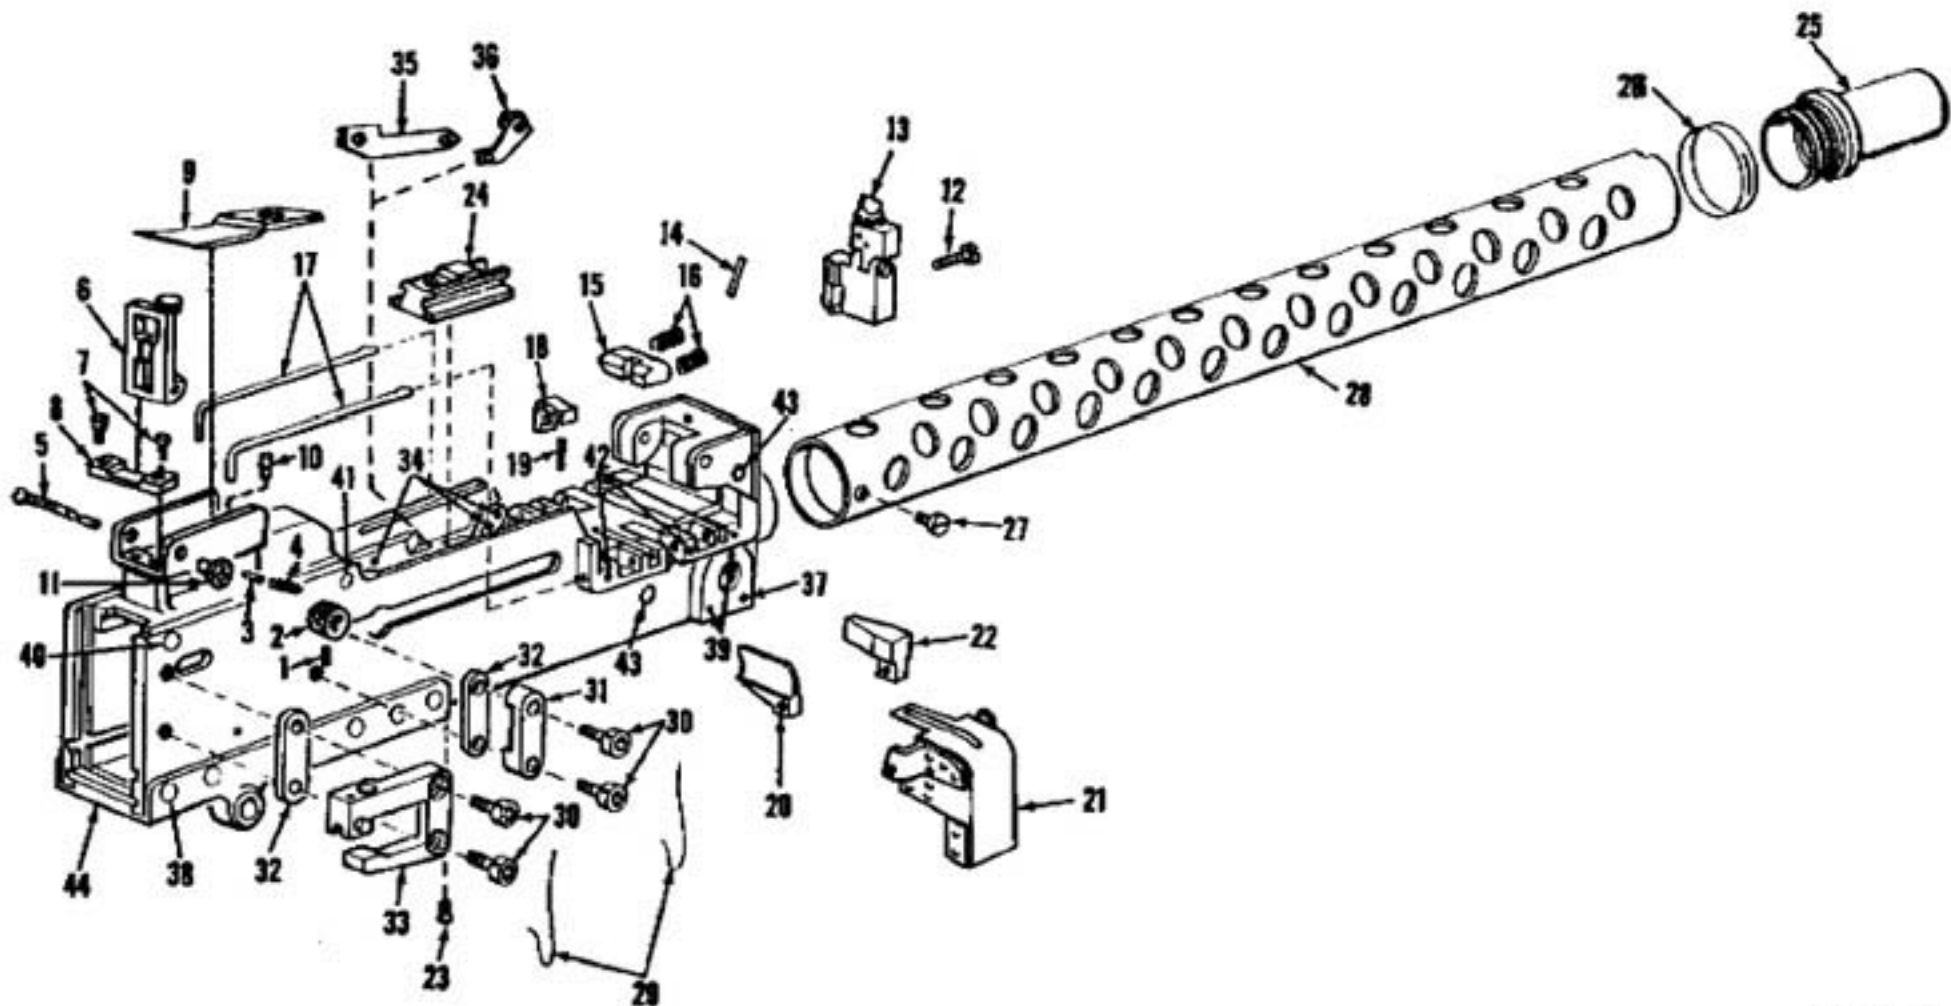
Casing and barrel jacket group for Caliber .30 Machine Guns, M1919A4 and M1919A6 only—exploded view.
